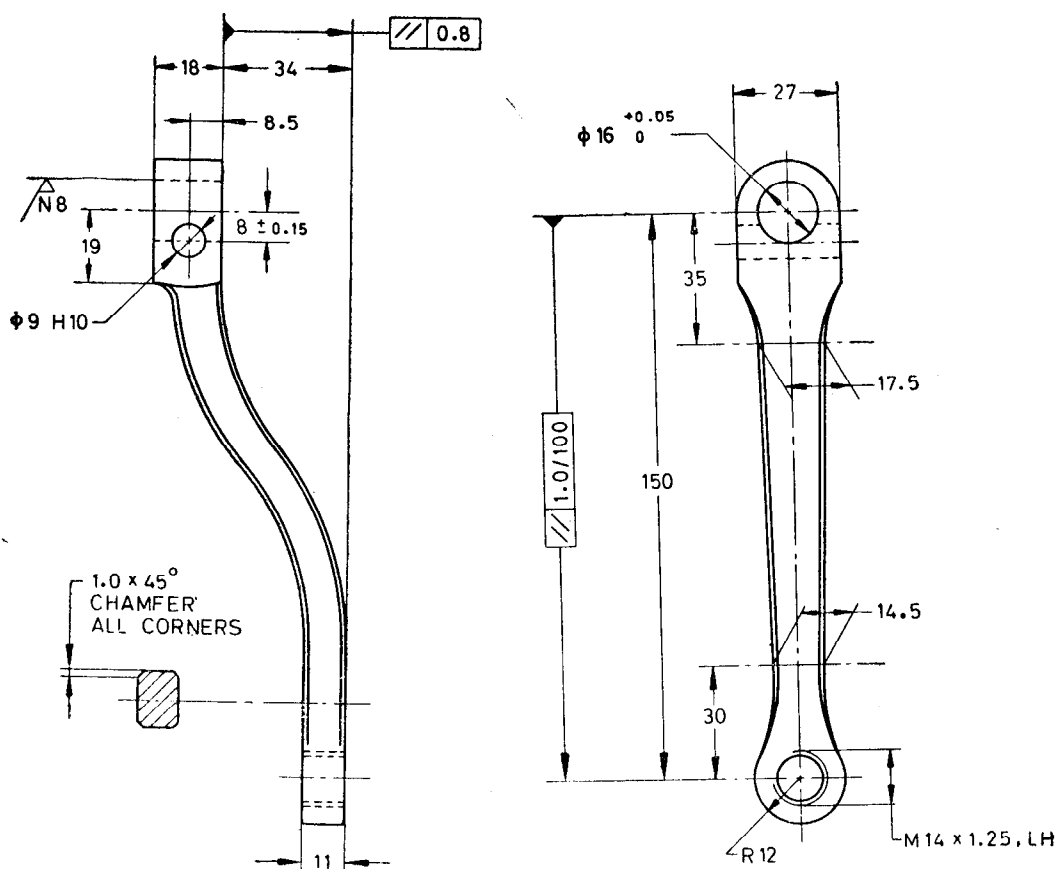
LEFT HAND (LH) PEDAL CRANK
